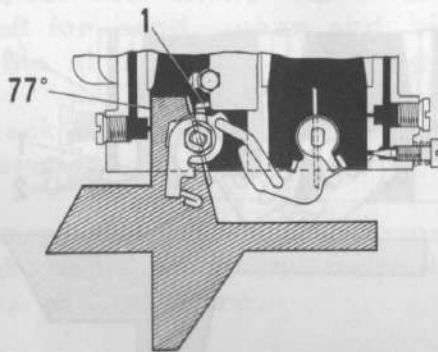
Adjusting Secondary Throttle Valve at X4131 Full-open Position
